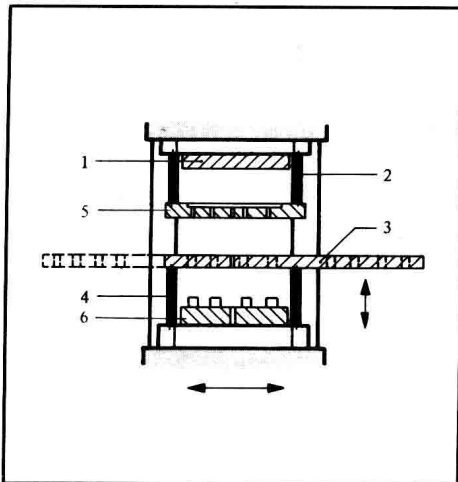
Middle plate sliding device with a double middle plate: injection runner plate (1), Intermediate mould plate (5). Double middle plate (3). Bottom mould plate (6). Hydraulic lifting devices (2 + 4)
